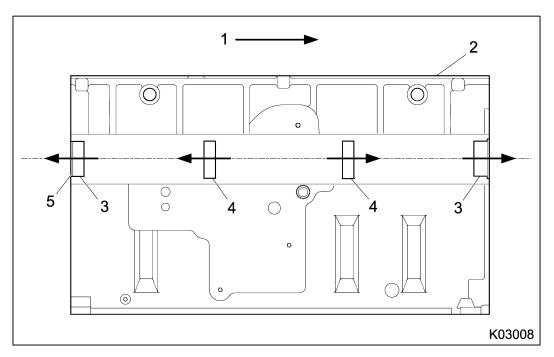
Camshaft bushing removal pull direction (partial crankcase cut-away)
